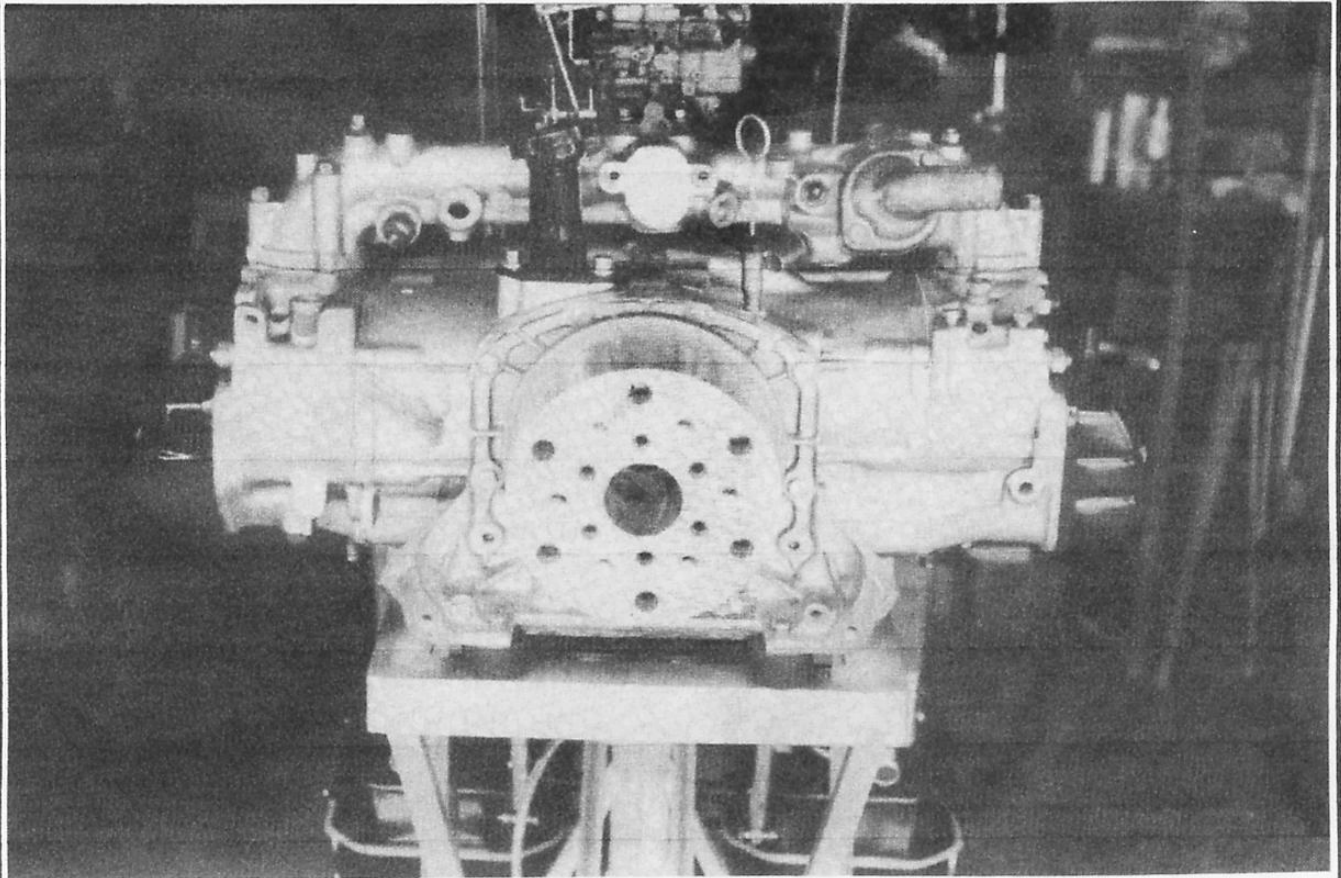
Completed engine with prop hub installed. The hub is bolted to a modified standard transmission flywheel. Three inch (approx) Rotax prop hub bolt pattern is the inner ring bolt holes. An S.A.E. five inch bolt pattern is also drilled in the hub adapter. Outer hole pattern is for attaching adapter to flywheel. Center bore allows visual inspection of crankshaft flange attach bolts.
